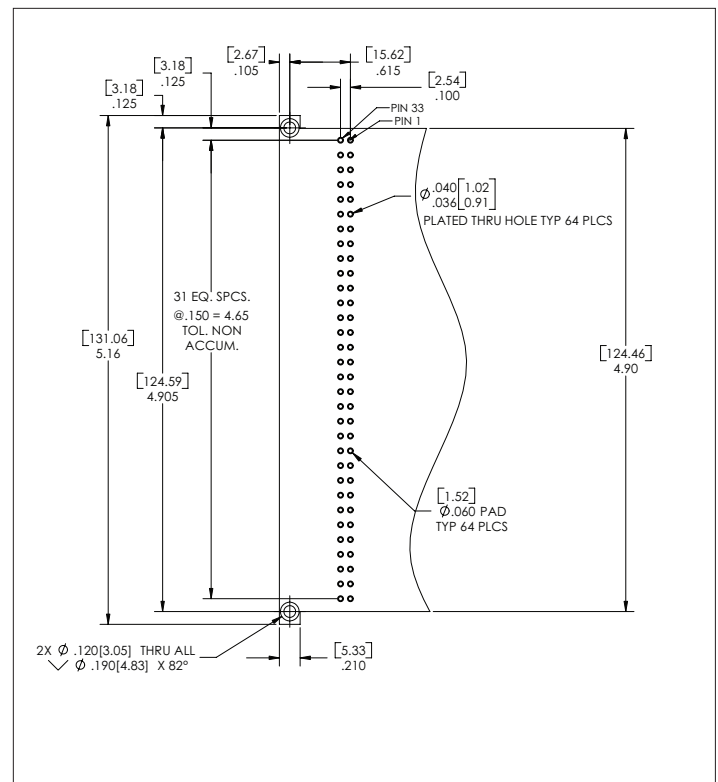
104 187 recommended board layout. Solder side shown.
